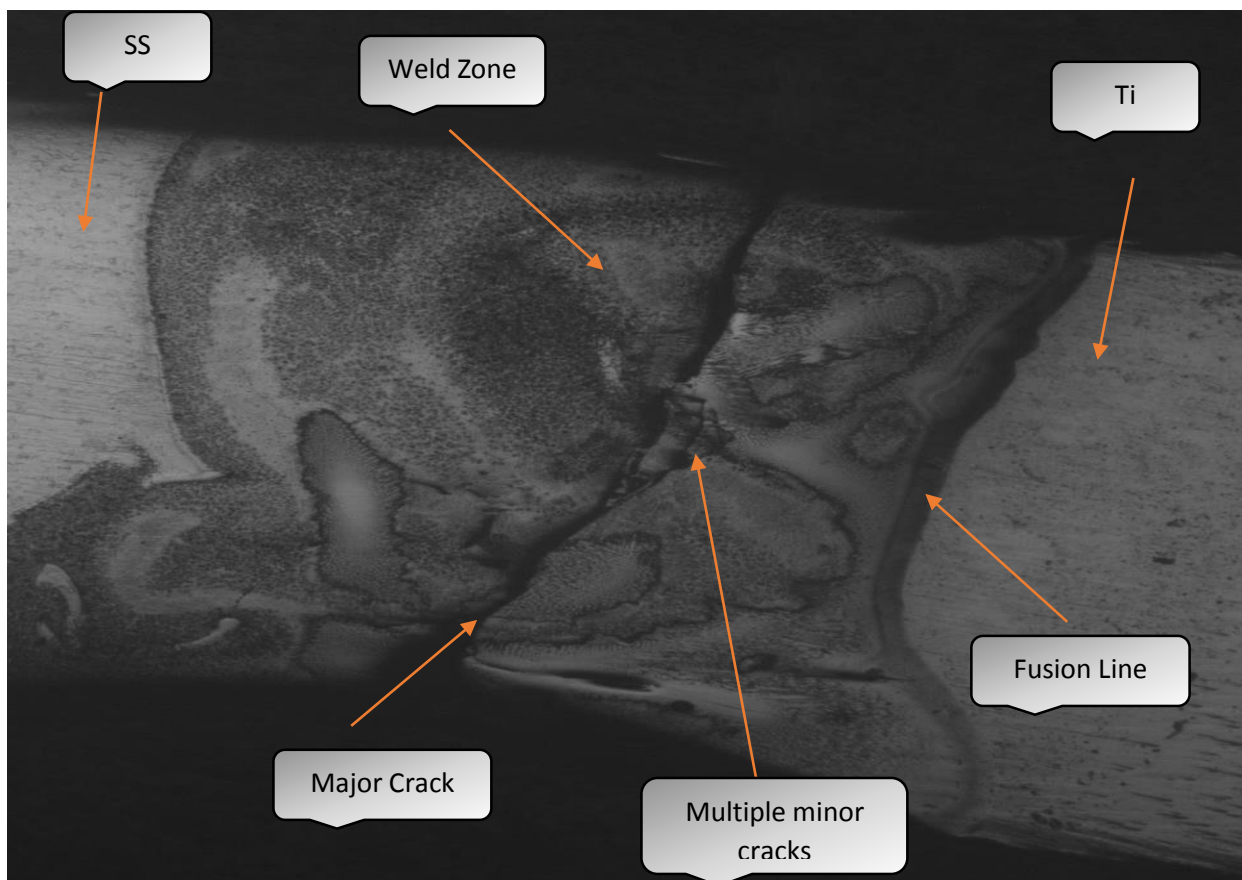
Weld cross-section (Without Filler). Note asymmetry of weld pool and presence of various microstructures in weld pool. Laser Power: 650W, Scan Speed: 300 mm/min.
